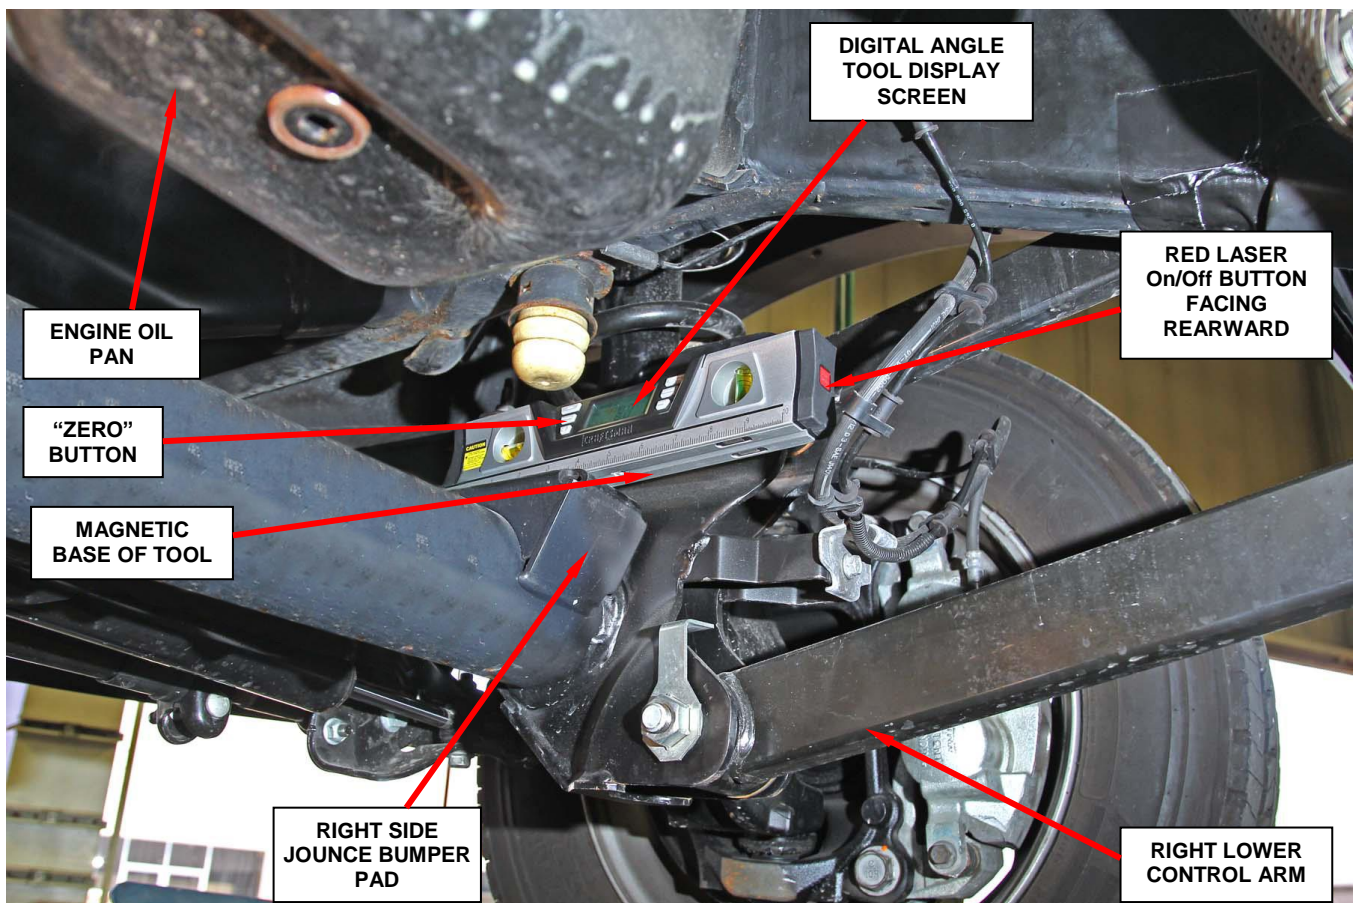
Digital Angle Tool on Right Jounce Bumper Pad
